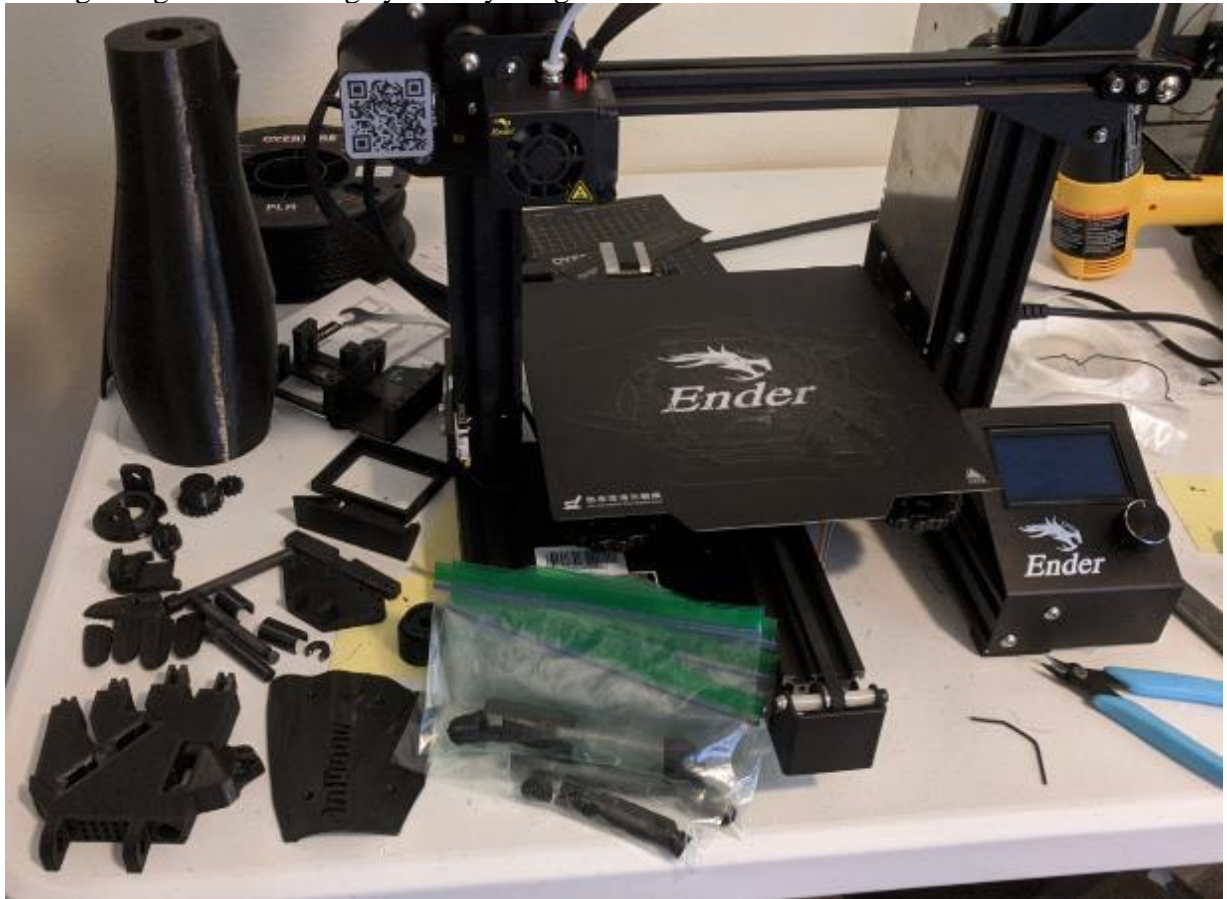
Printed pieces of the InMoov hand, wrist, and forearm.
